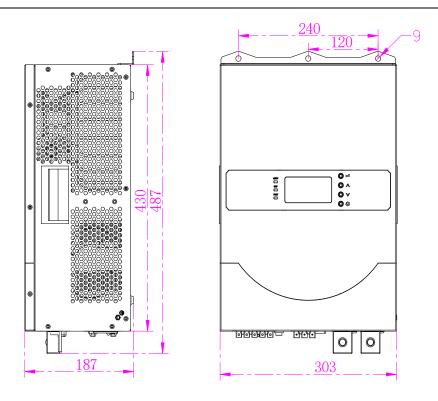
2000W $^{\sim}3000$ W integrated machine installation dimensions
